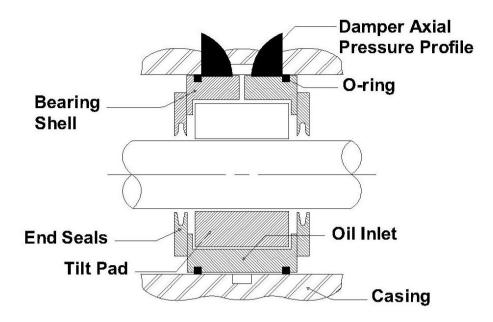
Proposed Damper Bearing Shel Design (Front View).
